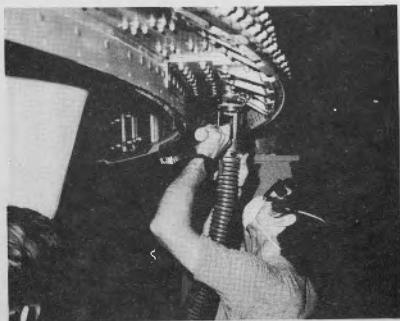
GRIT BLASTING AFT SKIRT — OVERHEAD POSITION
